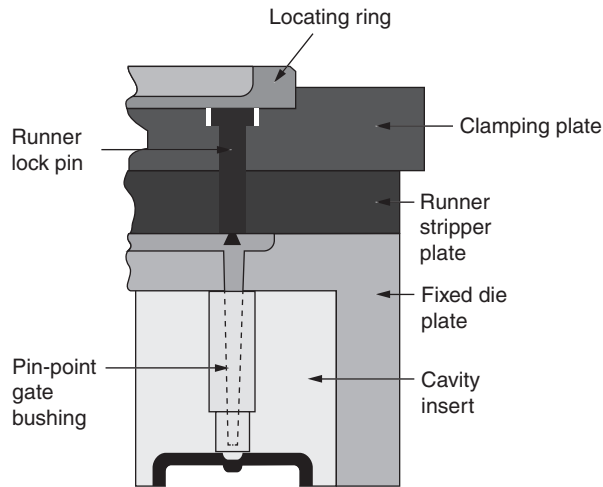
Locating Ring and Sprue bush in Assembled Condition
